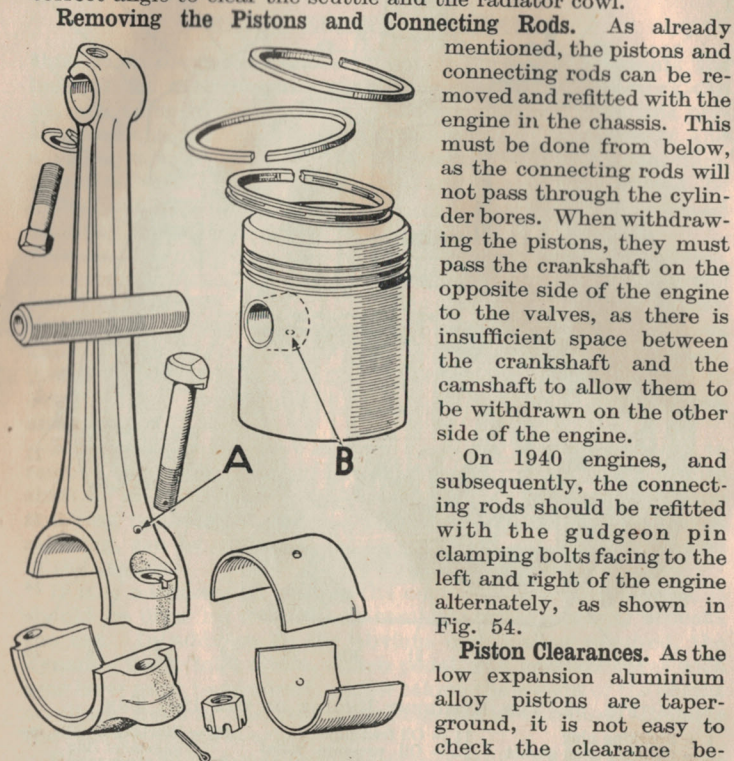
THE CONNECTING ROD AND PISTON ASSEMBLY USED ON 1940-7 ENGINES. "A" IS THE BIG-END OIL JET HOLE, AND "B" THE OIL HOLE IN THE GUDGEON PIN BOSS
